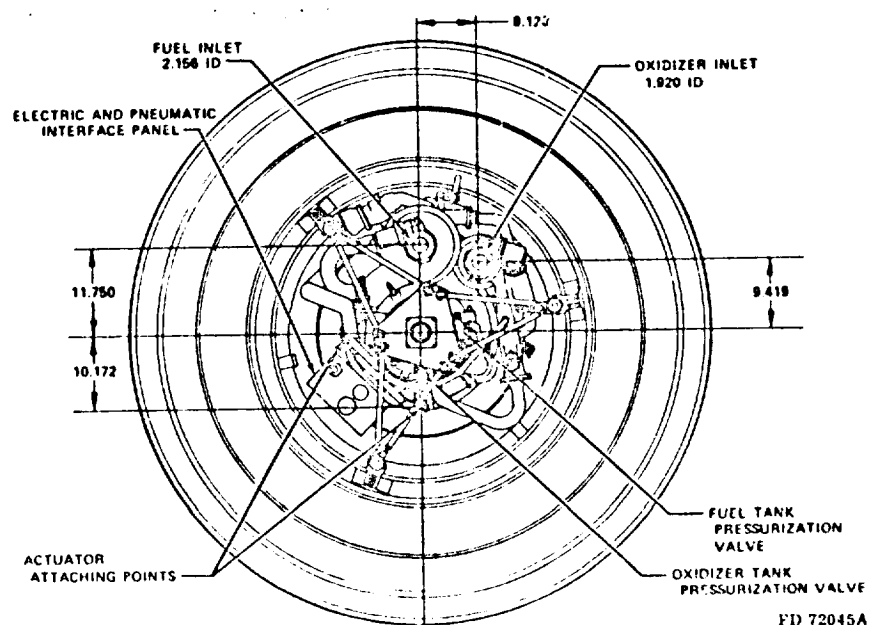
Derivative HB Engine Installation Drawing (Sheet 2)
